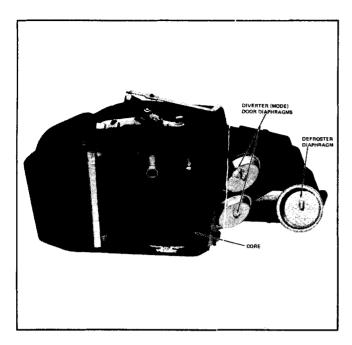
A-36 B Series A/C Heater Core and Case Assembly
